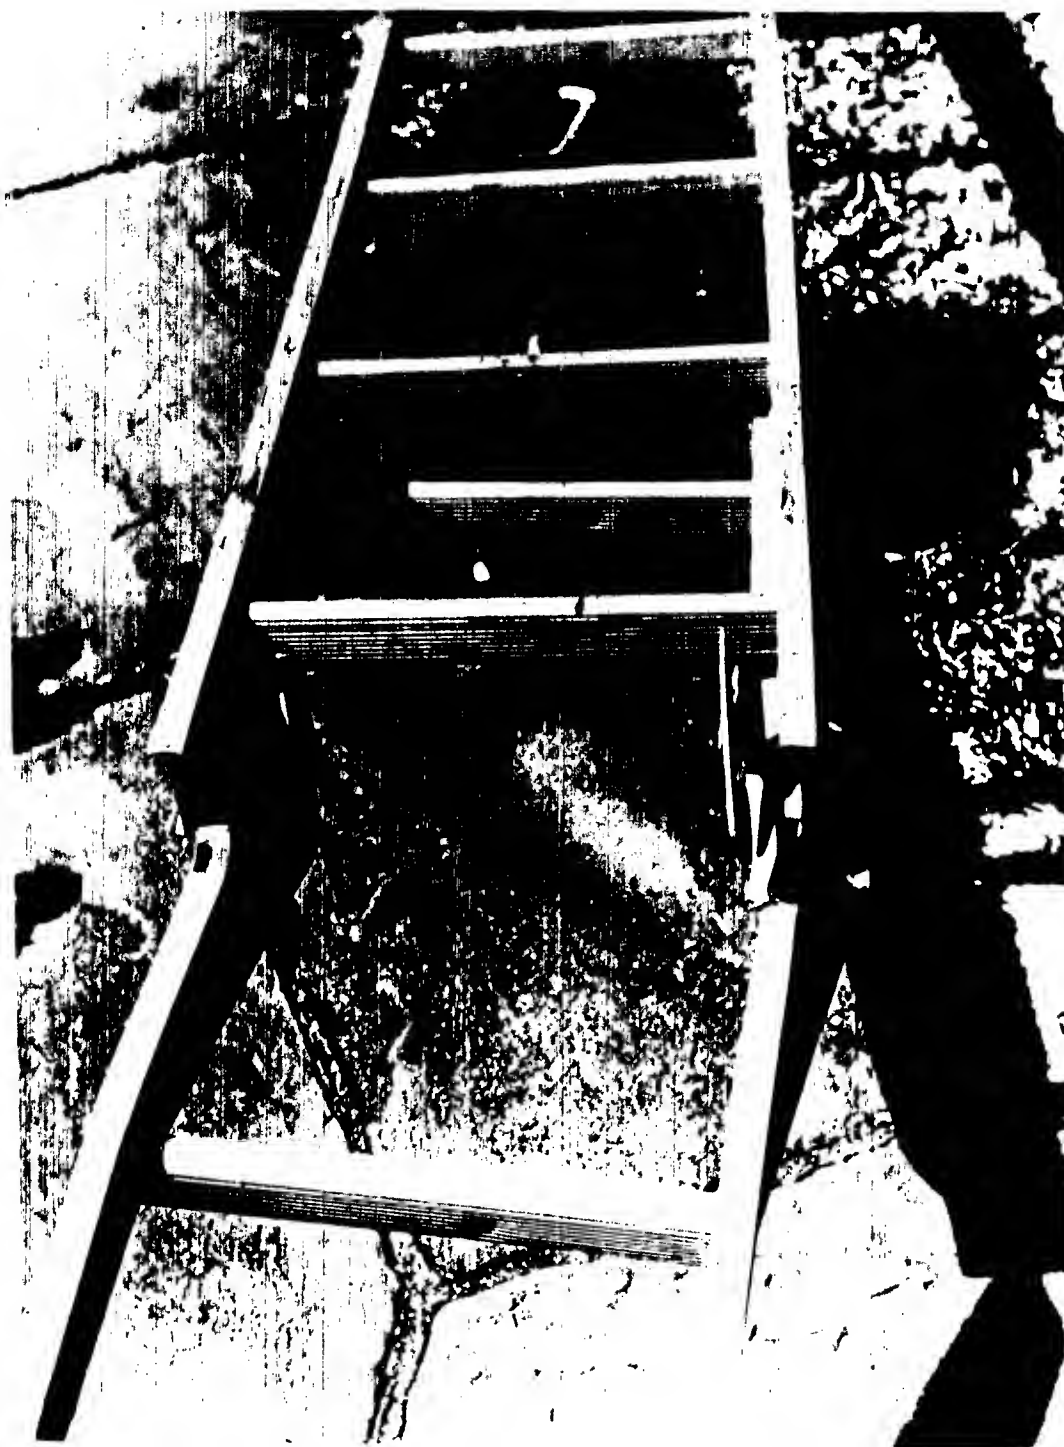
Closer view of damaged section of the ladder looking from top end toward the bottom.
